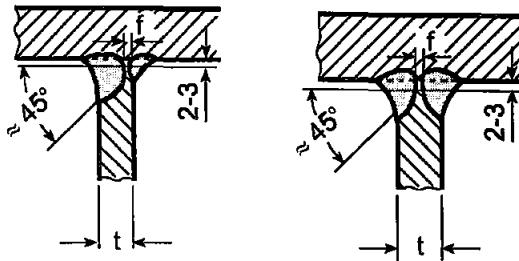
Single and double-bevel welds with defined incomplete root penetration
